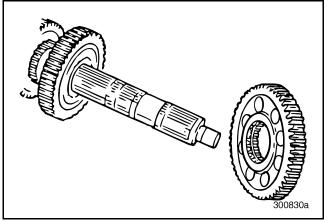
Removing Lo-Speed Gear (T313L/T318L Shown)
